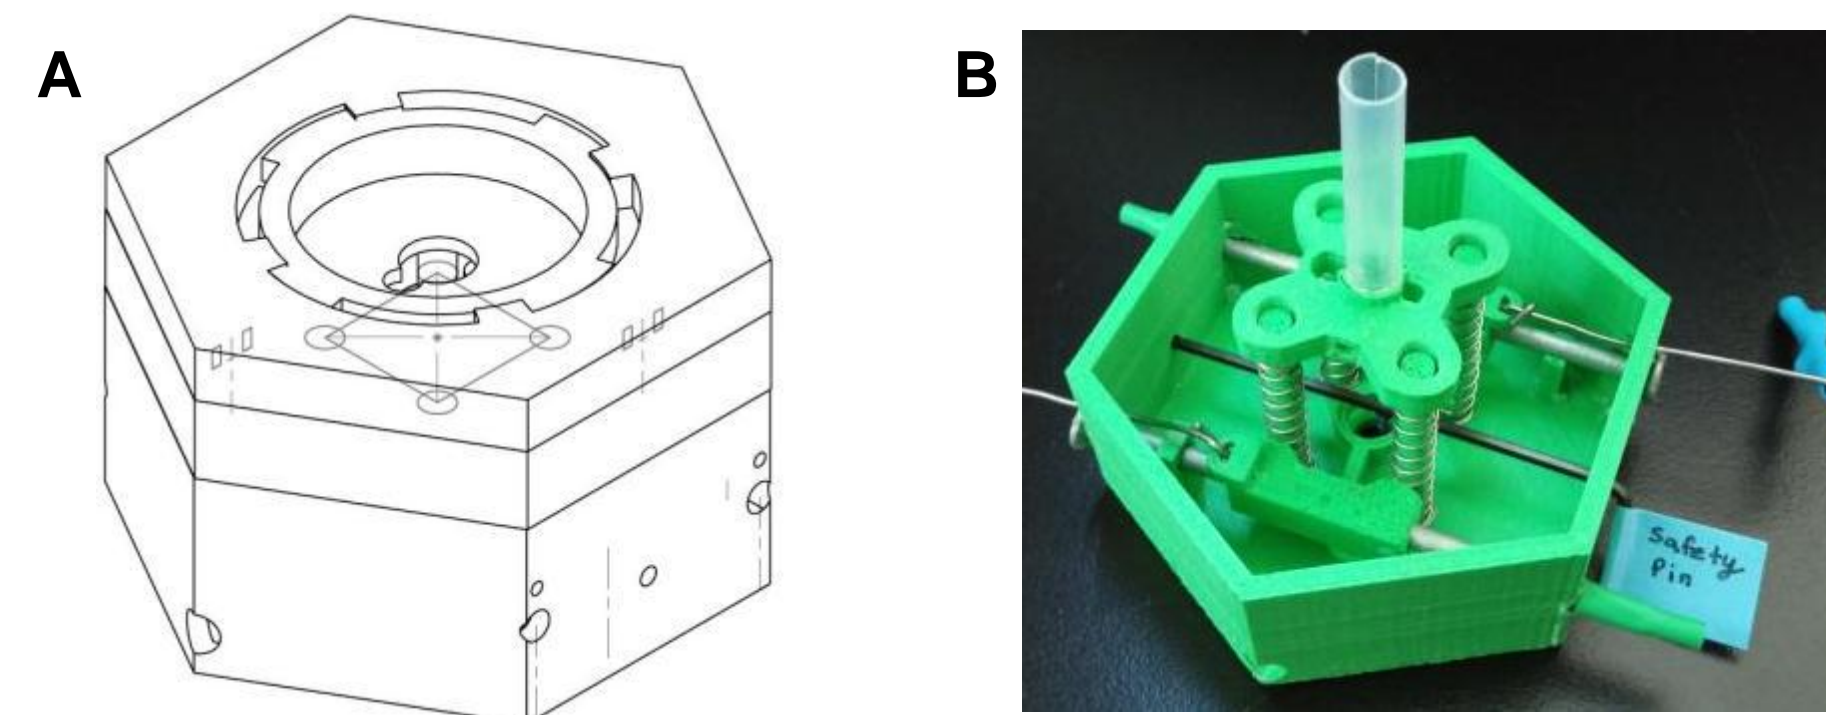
| Gasket Prototype. A, Full gasket assembly without balloon catheter. B, Section view of gasket showing spring loaded system with a mock nylon-12 tubing as a place holder for the balloon catheter.
